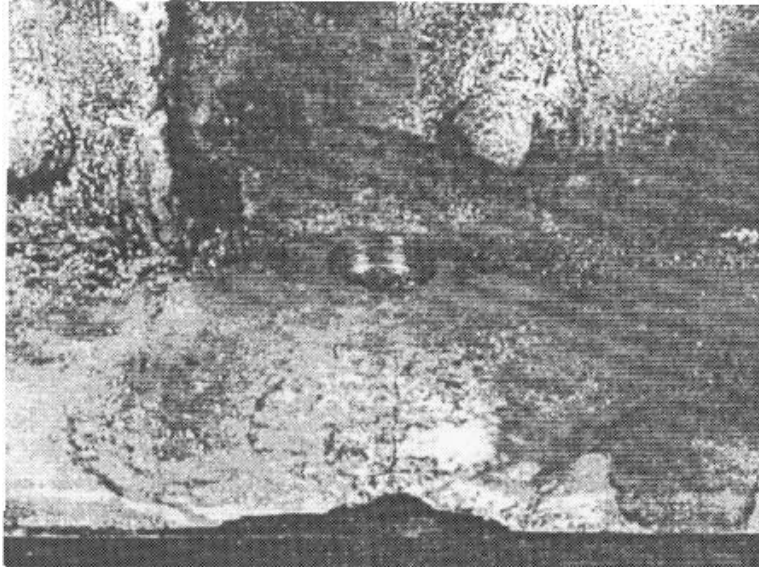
Fatigue crack from corrosion notch into rivet hole
